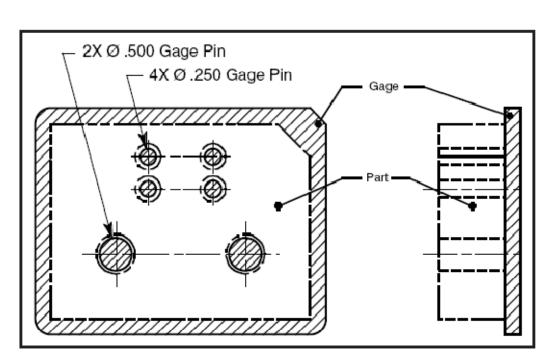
A gage locating the four-hole pattern to the two-hole pattern, datum D.
